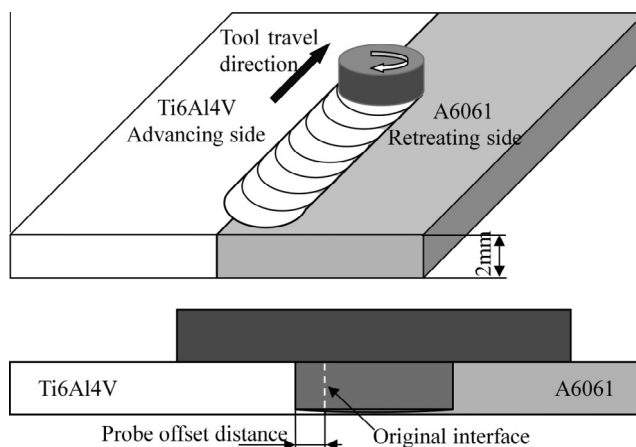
Schematic illustration of friction stir butt welding of Ti6Al4V/A6061.
